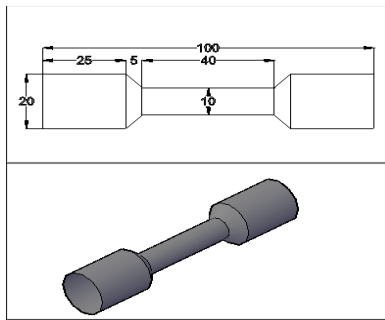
Samples of the specimens used for the tensile test (All dimensions are in mm)
